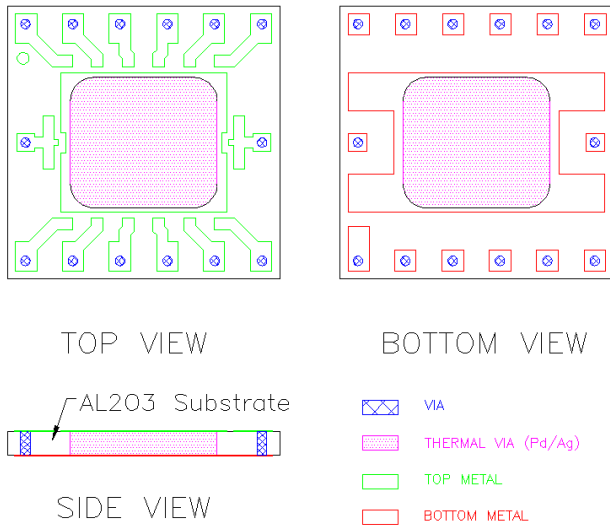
Package design for PA. The top, bottom, and side views are shown. The heat sink is a Pd/Ag filled metal slug.
